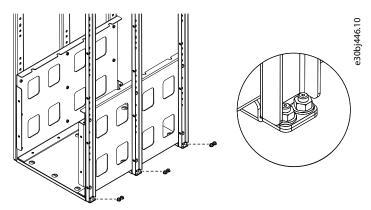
Mounting the Vertical Beams to the Horizontal Beams
